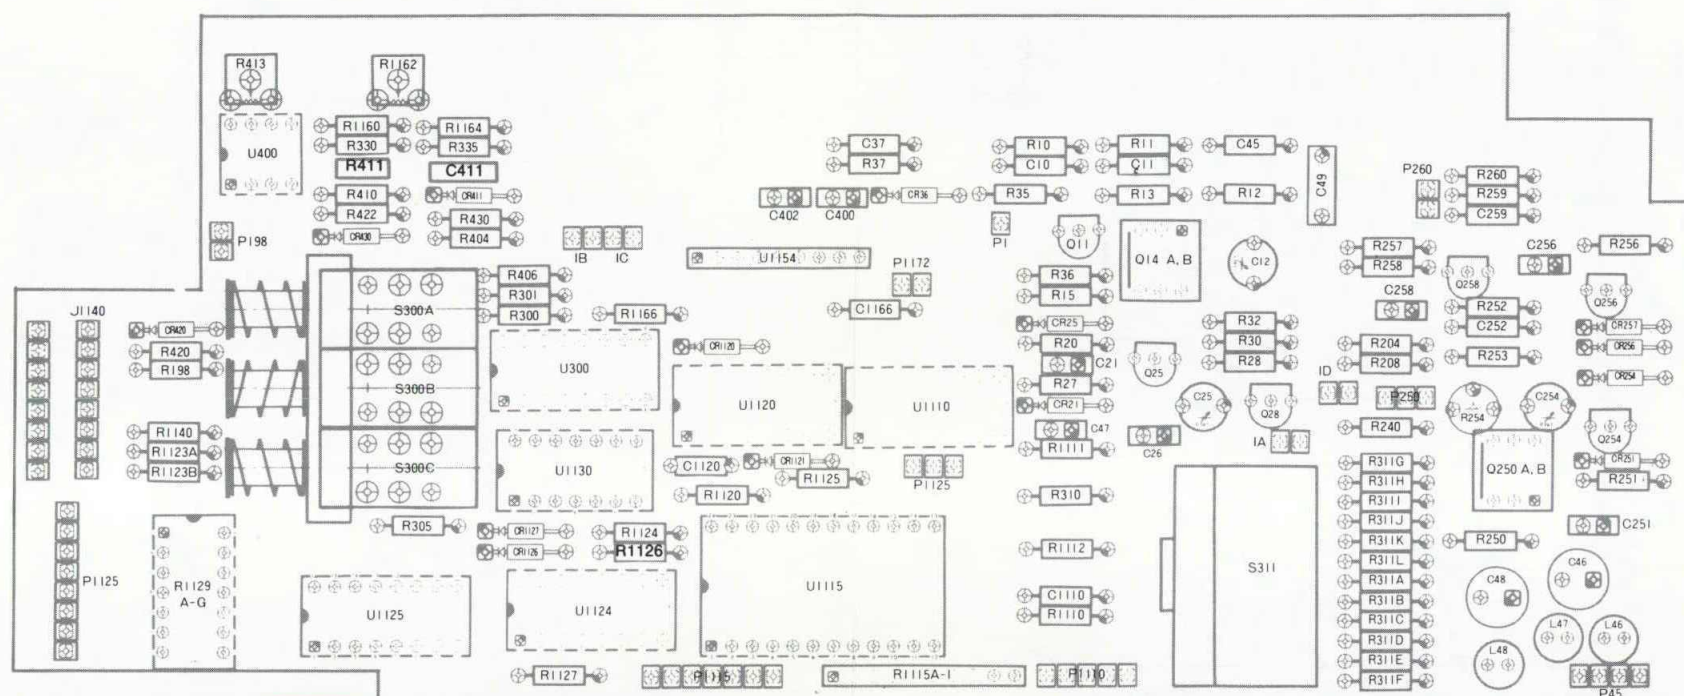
A2 INPUT BOARD PARTS LOCATIONS
